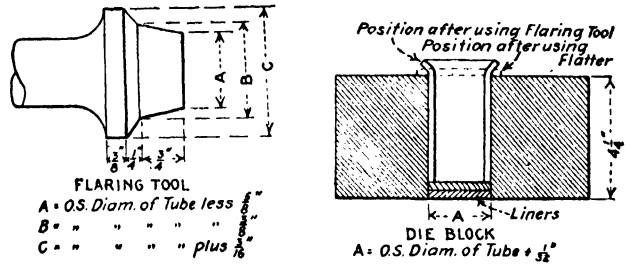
Details of flaring tool and die block for making flange test of boiler tubes.
